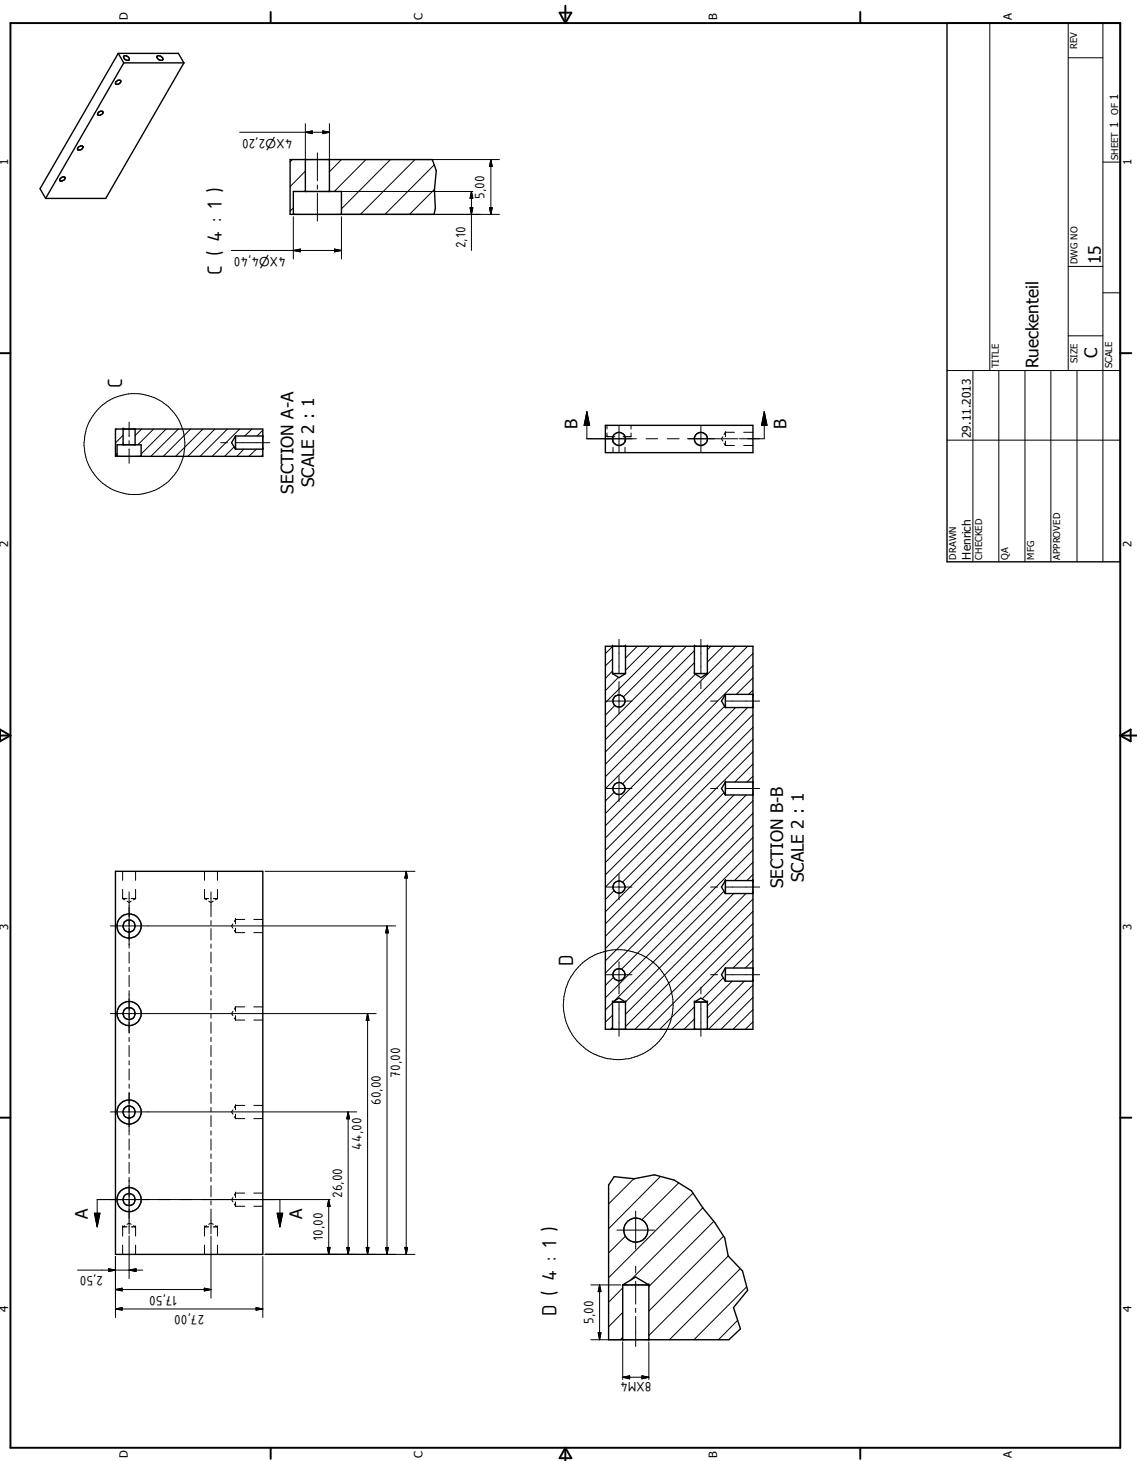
Technical drawing of the backside of the glass slide extension.
